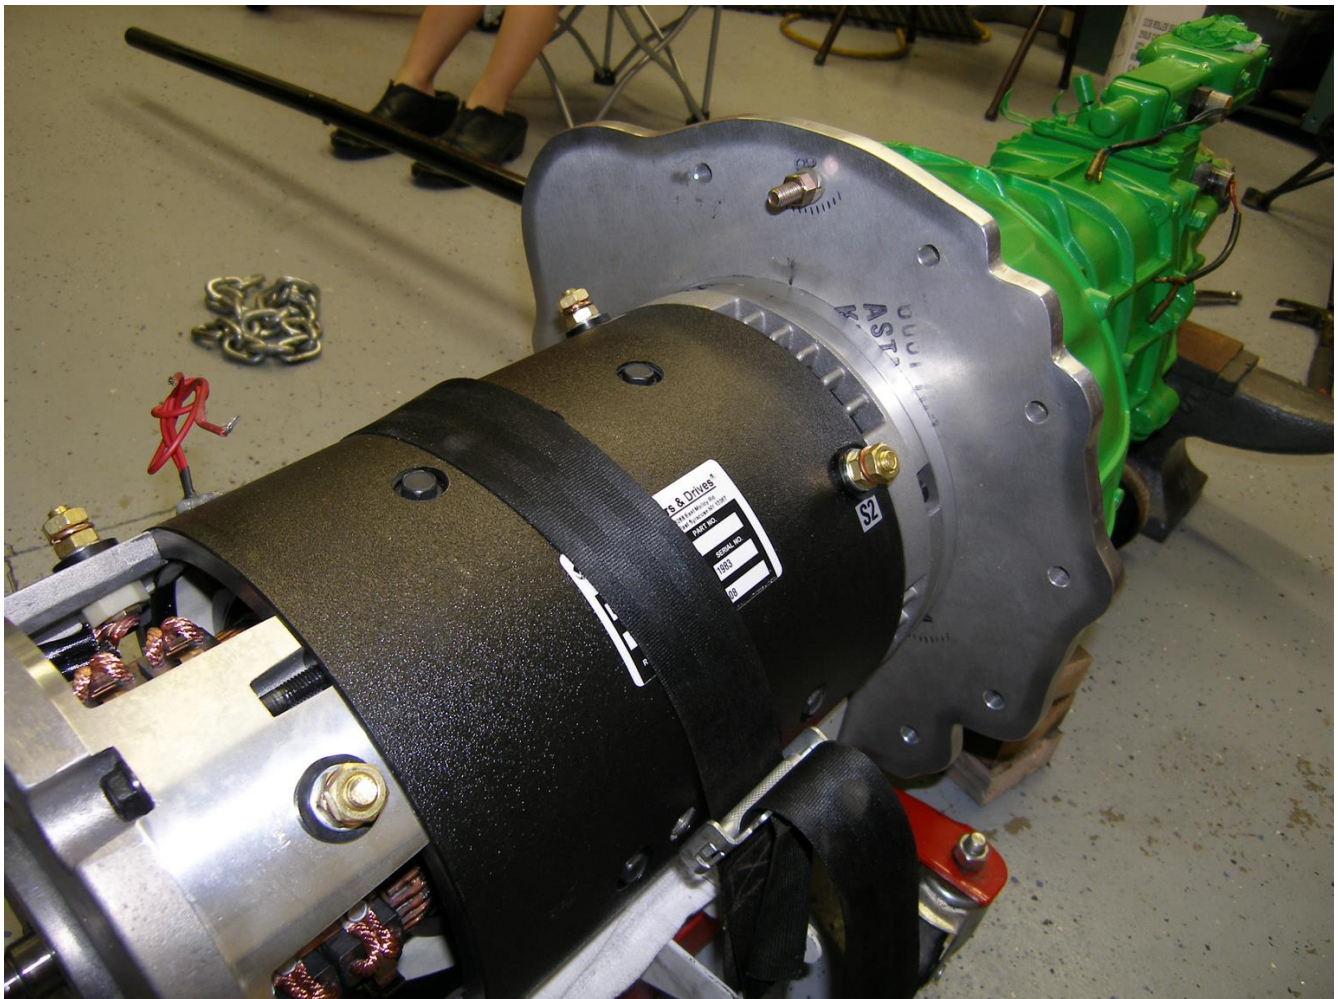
6 The “flower” as assembled between the motor and the clutch housing.
